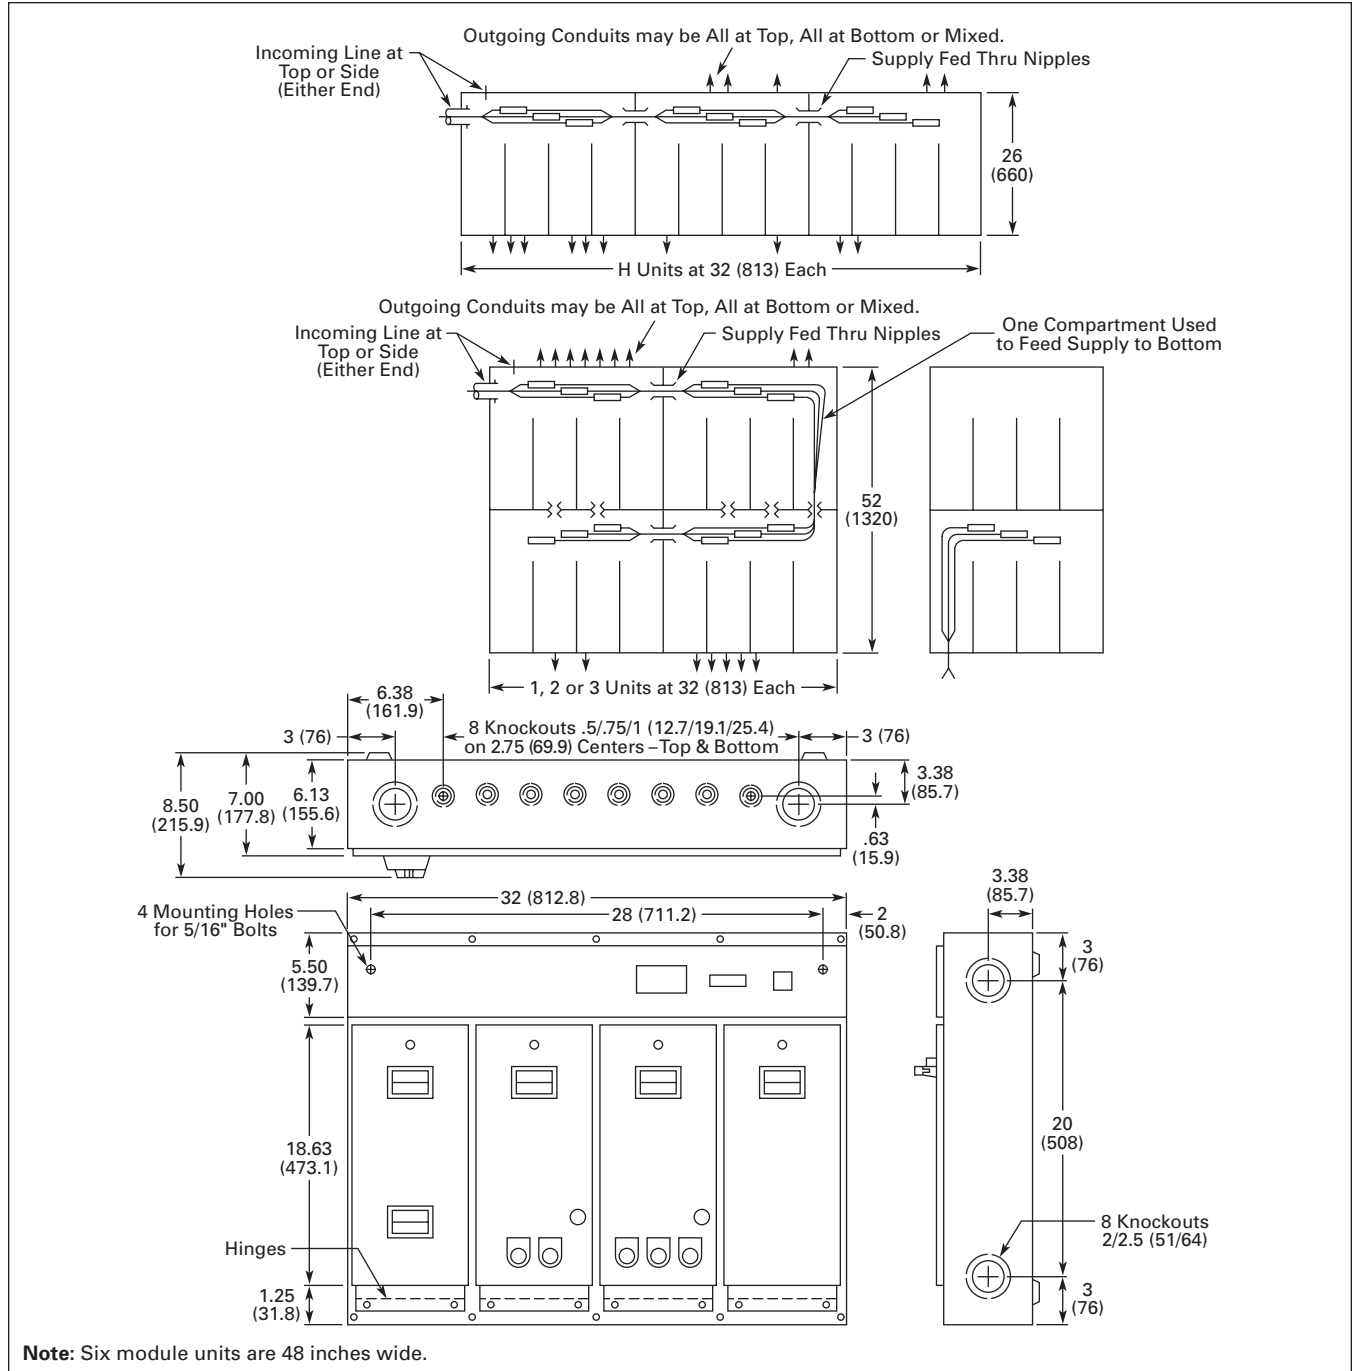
Approximate Dimensions and Wiring Arrangements, Four Module Unit
